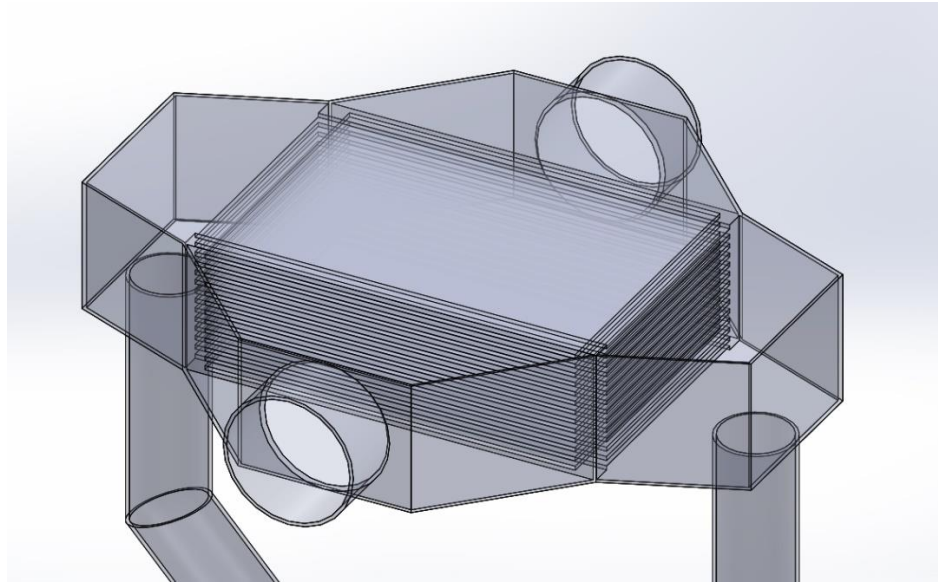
D Wireframe model of welded plate heat exchanger assembly
